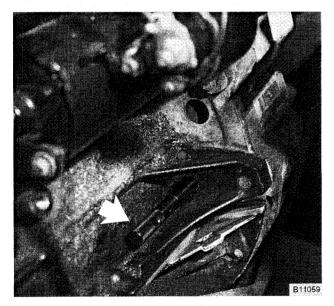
Crankshaft locking tool (BMW special tool 11 2 300) inserted through bellhousing hole and into flywheel (arrow).
